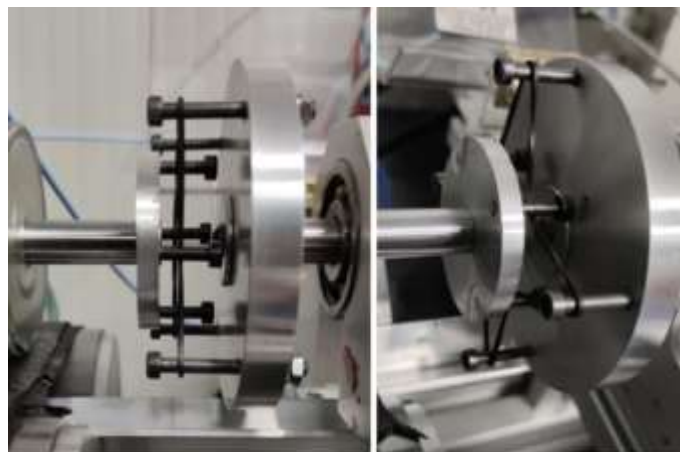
Elastic joint for electric motor-shaft coupling
